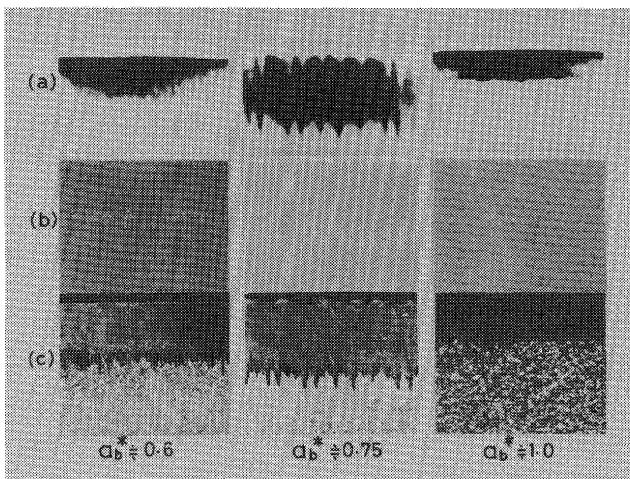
X-ray film photographed from side of weld bead by pin-hole camera and radiography (1200).
